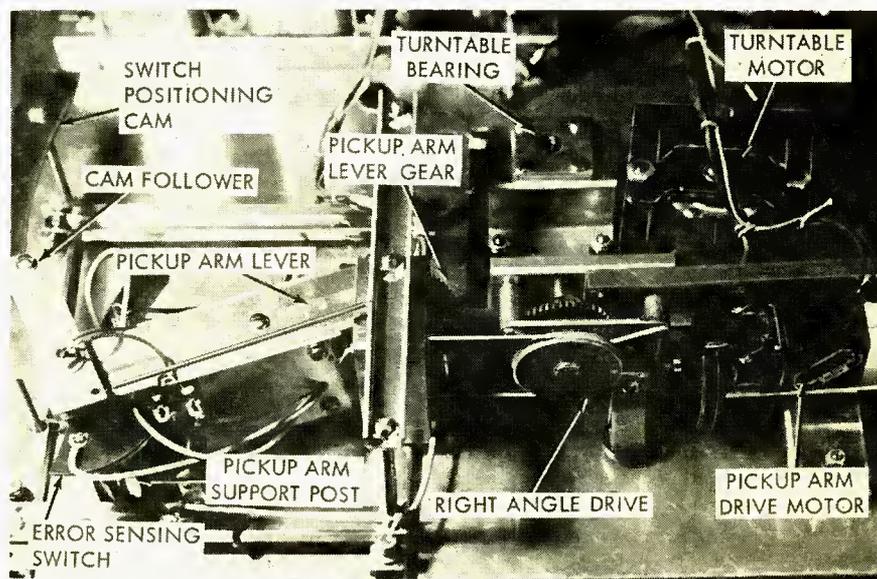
Under-chassis view of mechanism showing all mechanical parts. It is to be noted that only seven moving parts are involved in the arm positioning section including the motor and belt, and that it can easily be done with three. A simple clutch was also used successfully to take power from the turntable to position the pickup-arm mount.
